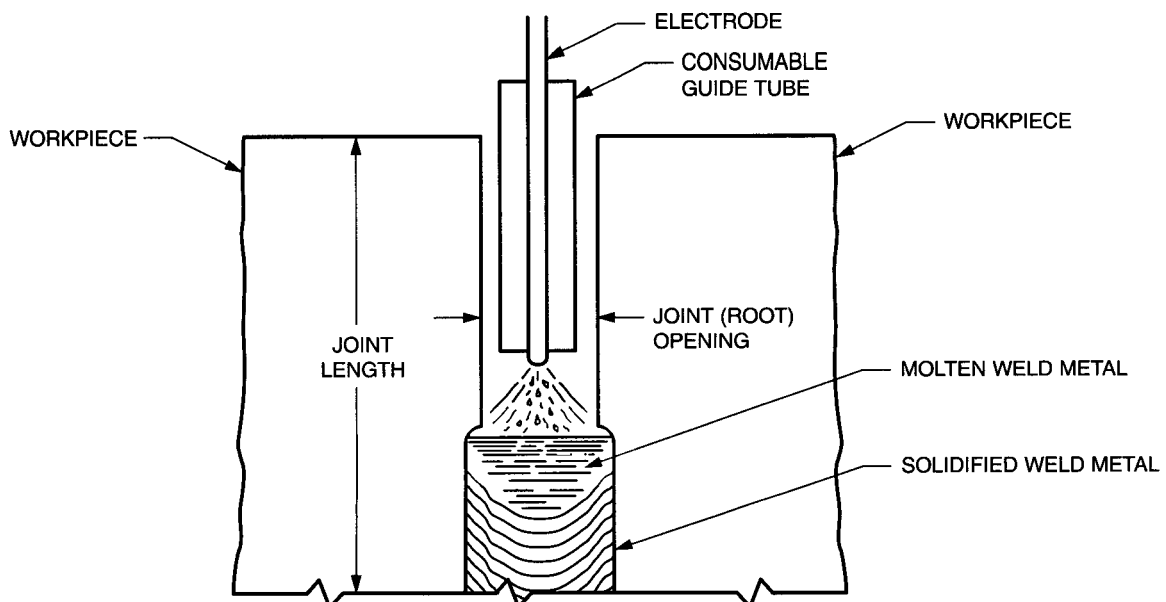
Schematic View of Consumable Guide Electroslag Welding
